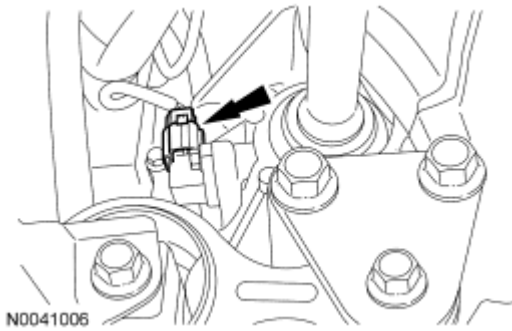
Locating Output Shaft Speed (OSS) Sensor Electrical Connector
